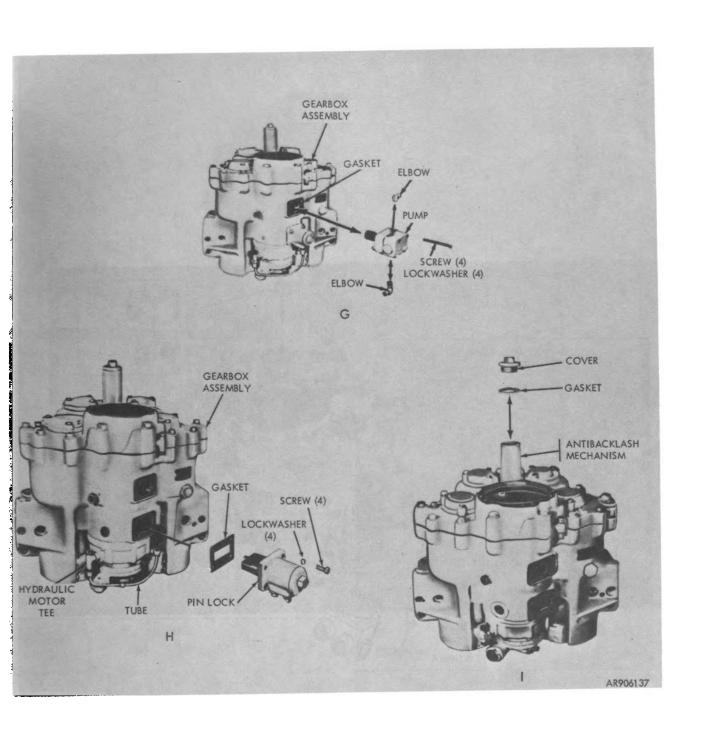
Traversing gearbox disassembly or assembly (4 of 15).
